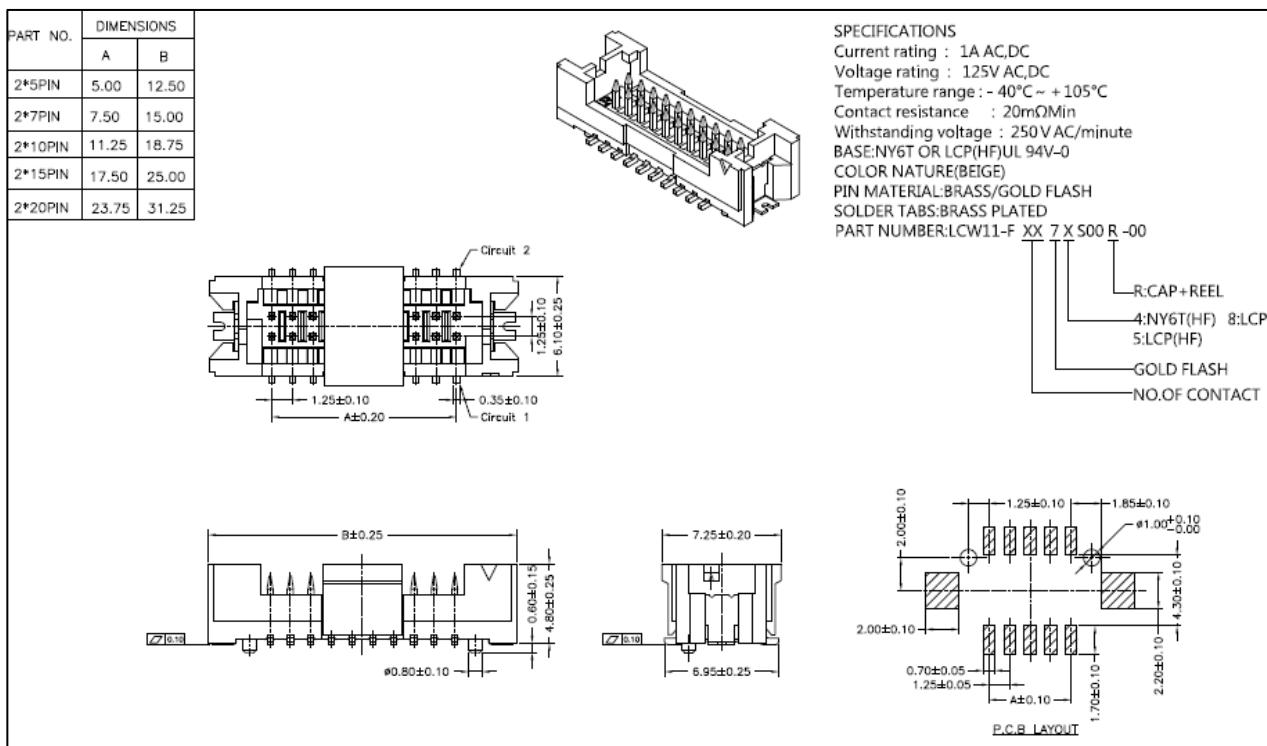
Wire to Board SMD 2*10P Connector Drawing (CN1/CN2/CN3)
